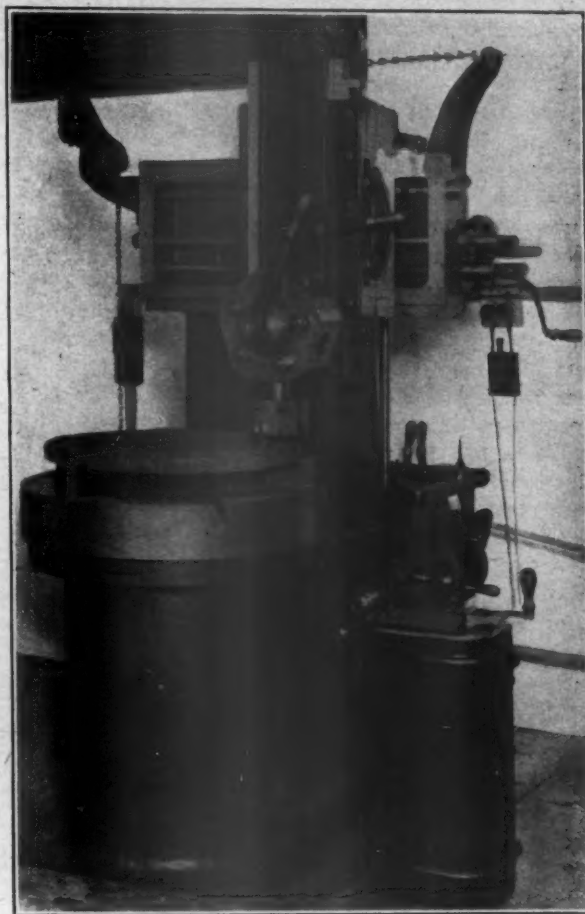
31-IN. ROGERS MACHINE TOOL COMPANY BORING MILL AND RHEOCRAT.
